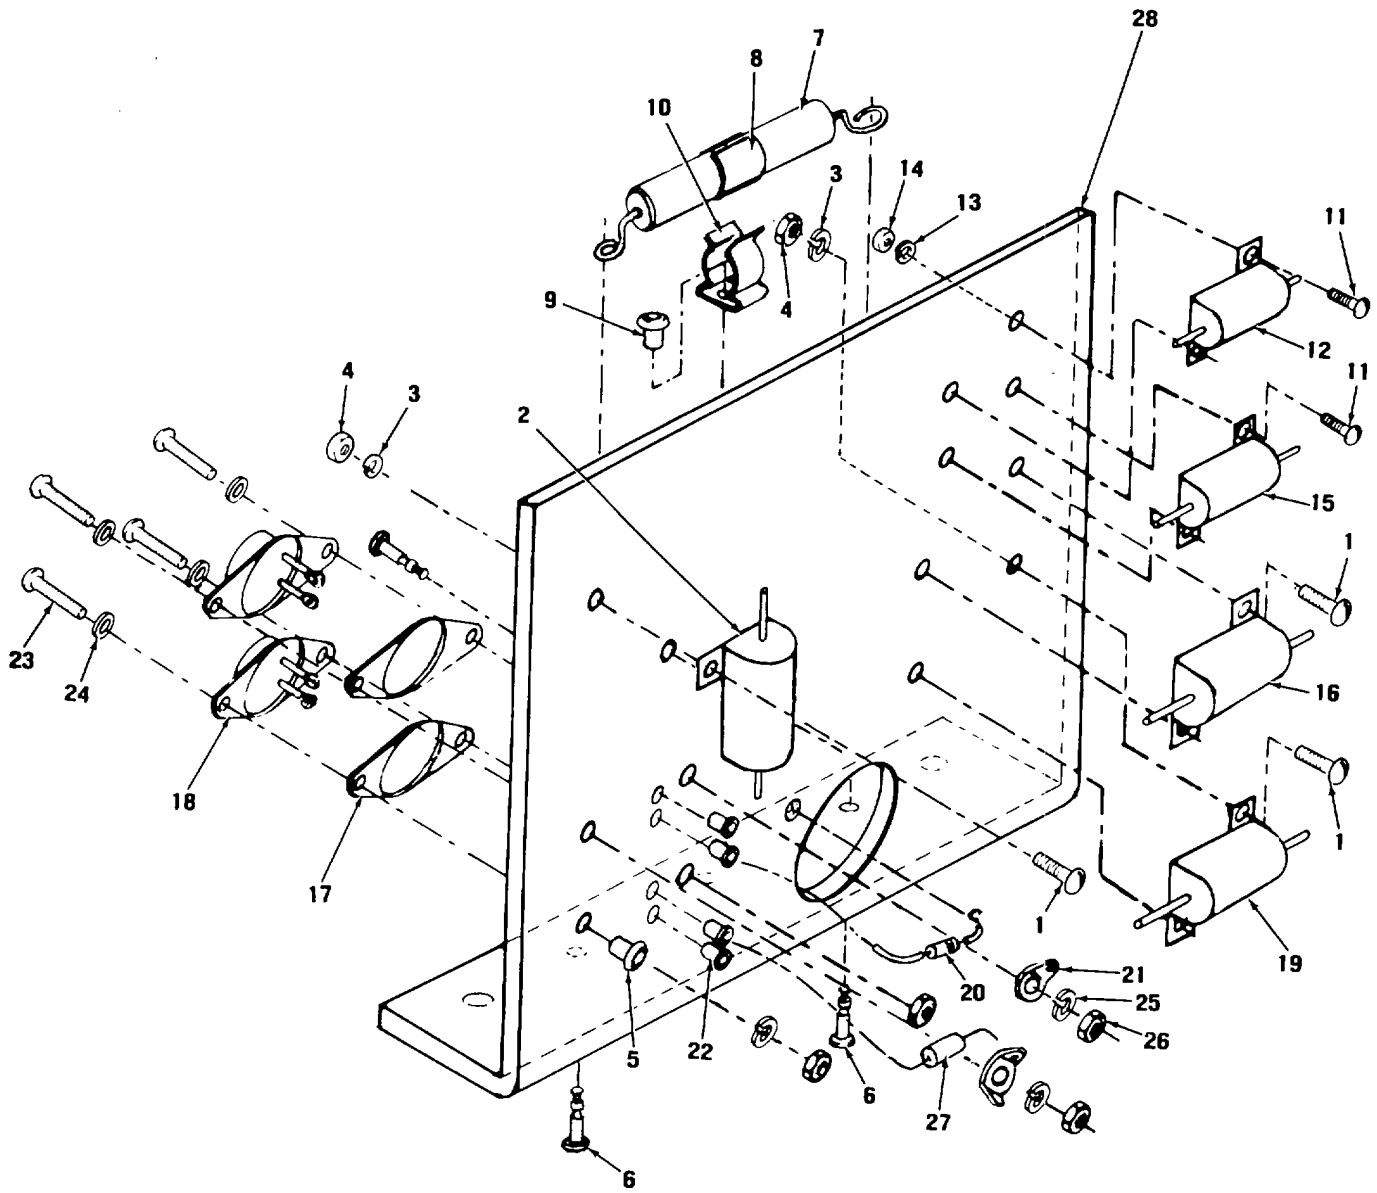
Monitor, Cabinet, Type C (CY-7361) Printed Wiring Board Mounting Plate
